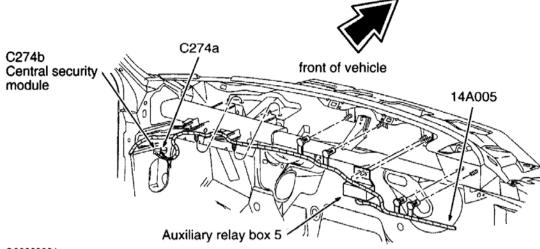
Locating Auxiliary Relay Box 5 Courtesy of FORD MOTOR CO.
